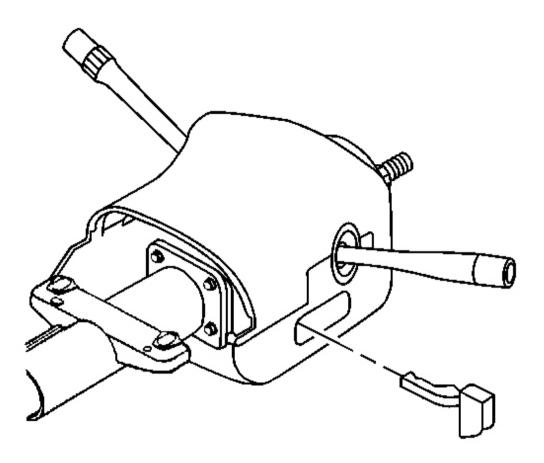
Locking Tab & Tilt Lever Handle Courtesy of GENERAL MOTORS CORP.
